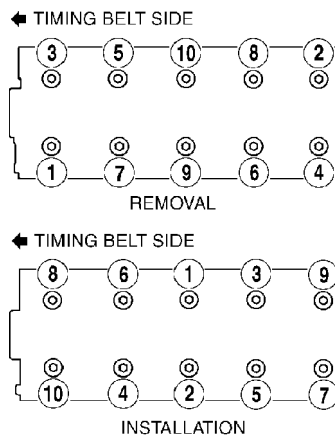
Cylinder Head Bolt Removal & Installation Sequence (1.5L)
